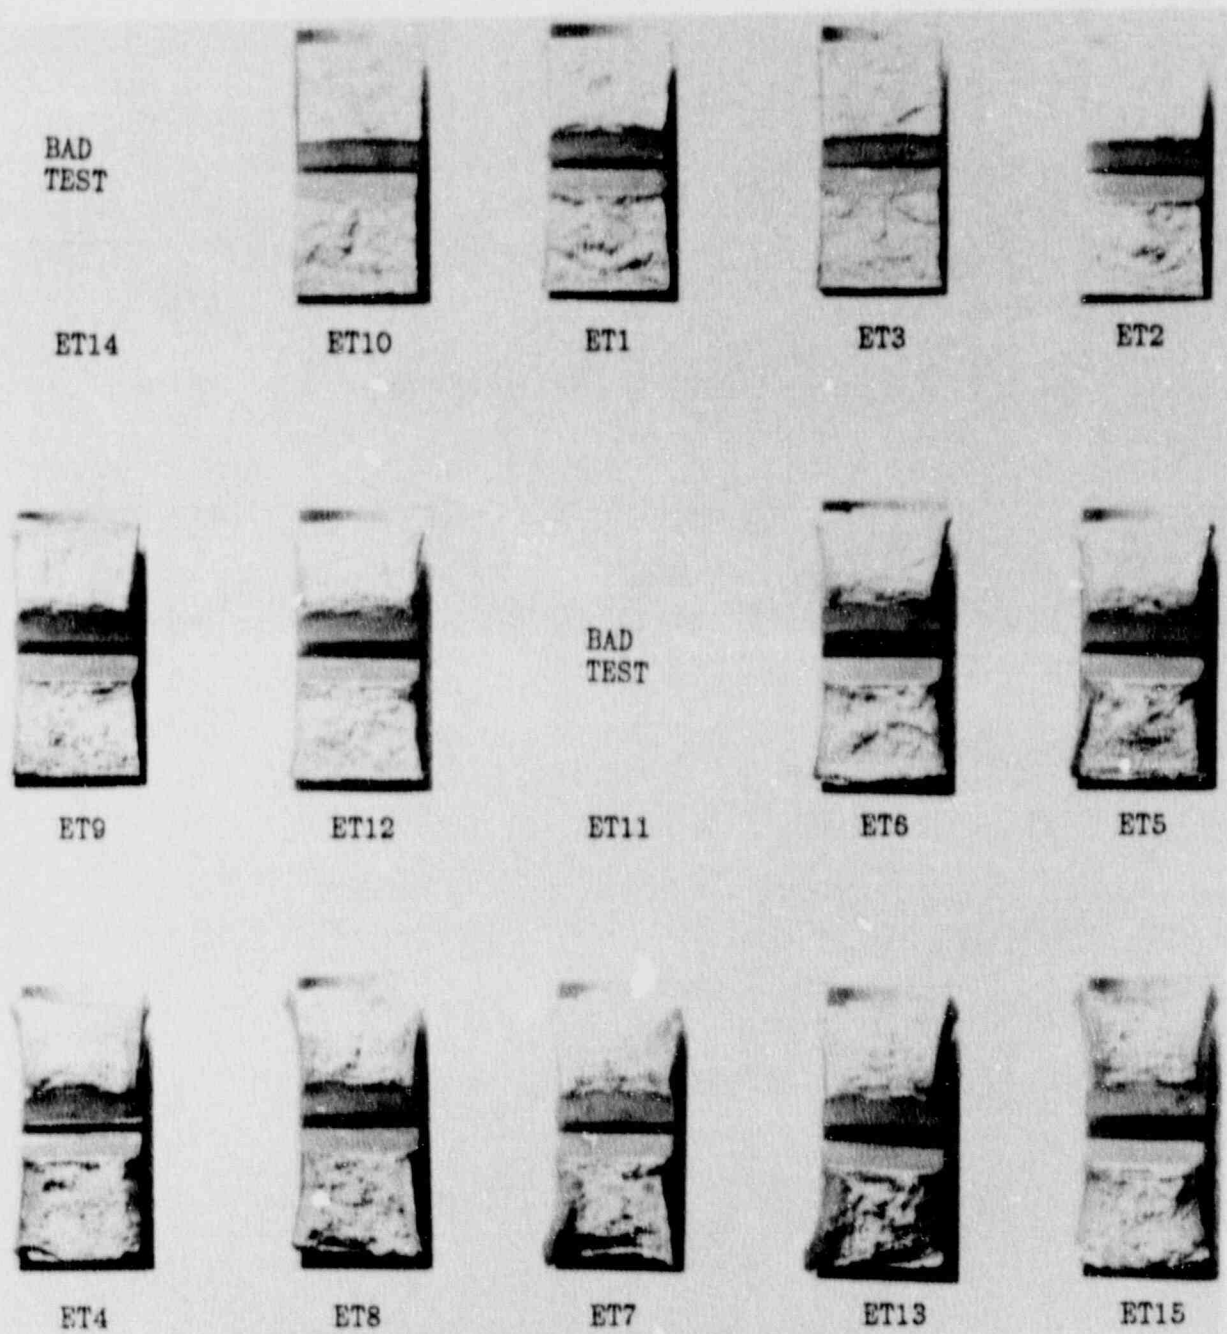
Charpy Impact Specimen Fracture Surfaces for Braidwood Unit 1 Reactor Vessel Shell Forging 49D867-1/49C813-1 (Axial Orientation)
